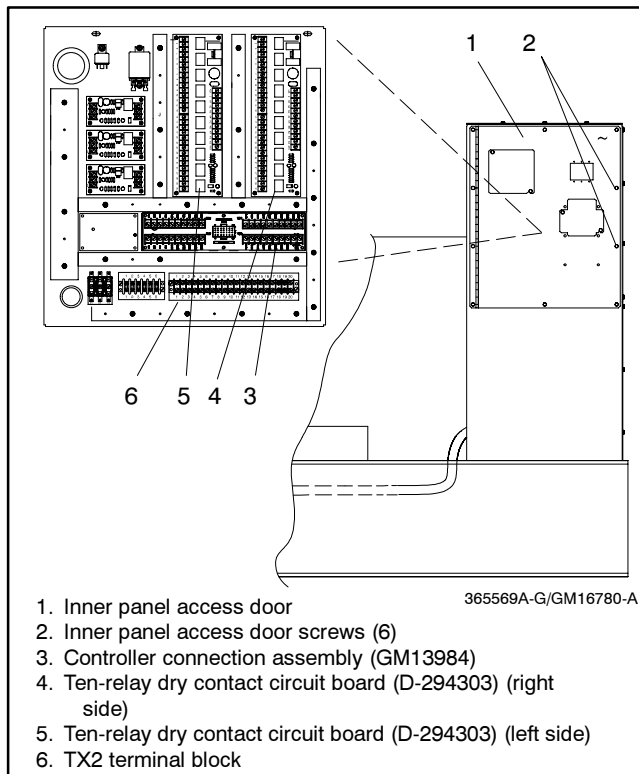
Terminal Block Bracket Mounting in Junction Box (450-2000 kW)
